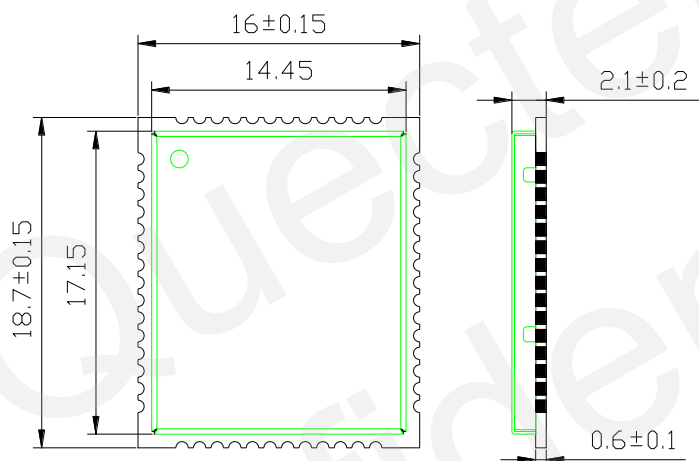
MC60-OpenCPU Top and Side Dimensions (Unit: mm)
